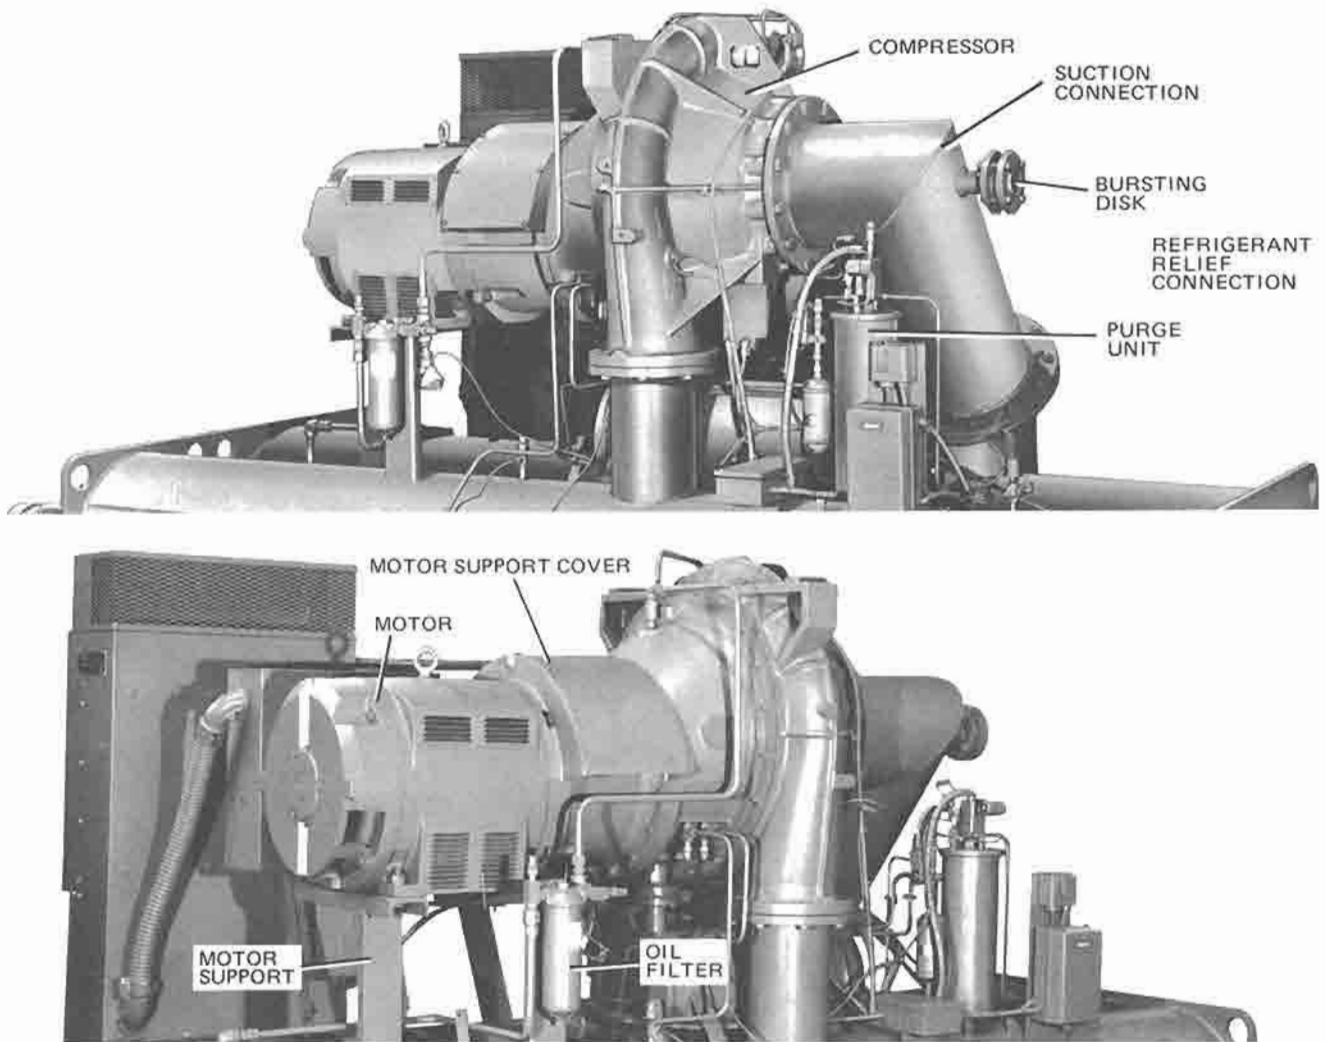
COMPRESSOR ASSEMBLY — WITH MOTOR
